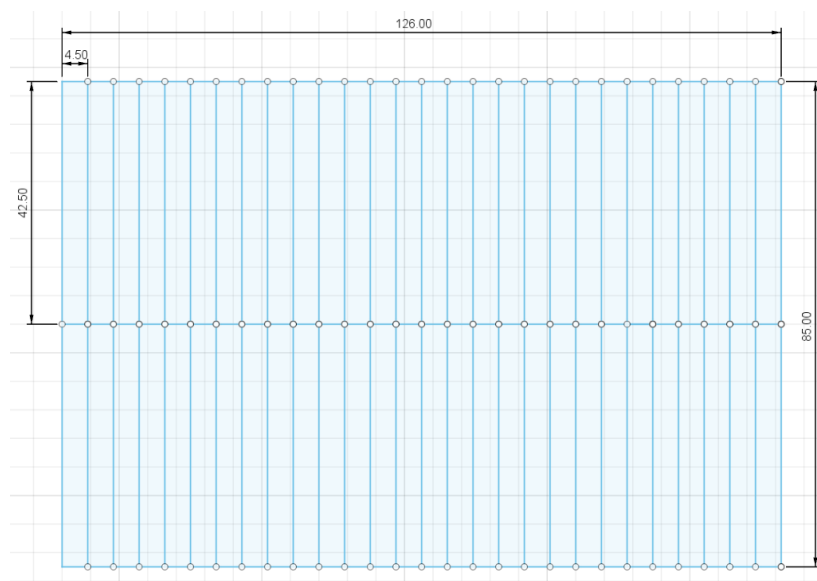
Sketch of the dimensions used to laser cut the A4 sheet of nitrocellulose membrane into a batch of 56 strips. Up to 4 batches could be cut from each sheet. (Sketch from Fusion 360, with units shown in mm).
